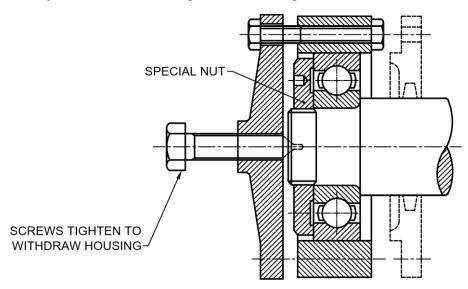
HOUSING WITH THROUGH HOLES FOR END COVER BOLTS
